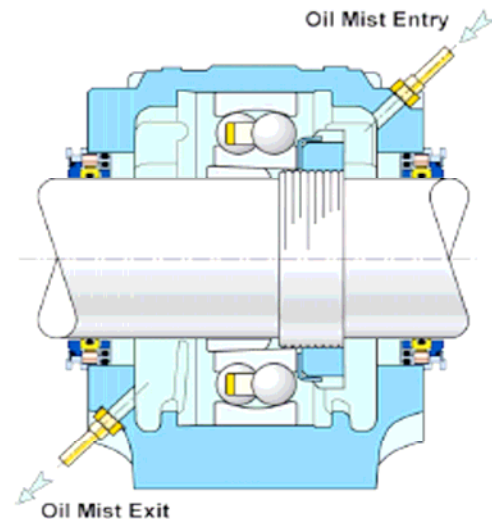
Magnetic face seals installed on a pillow-block bearing of the type that may be used on fin-fan shafts.
